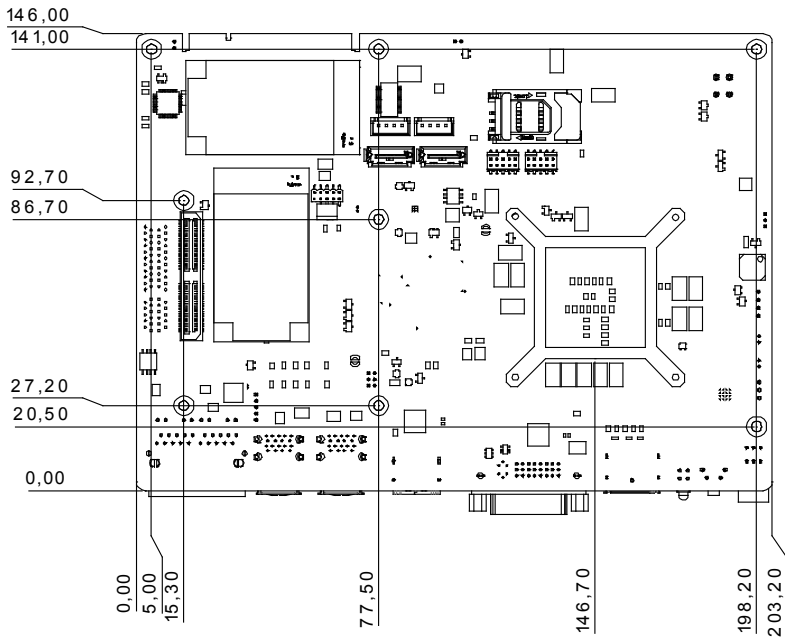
MIO-9290 Mechanical Drawing (Bottom Side)
